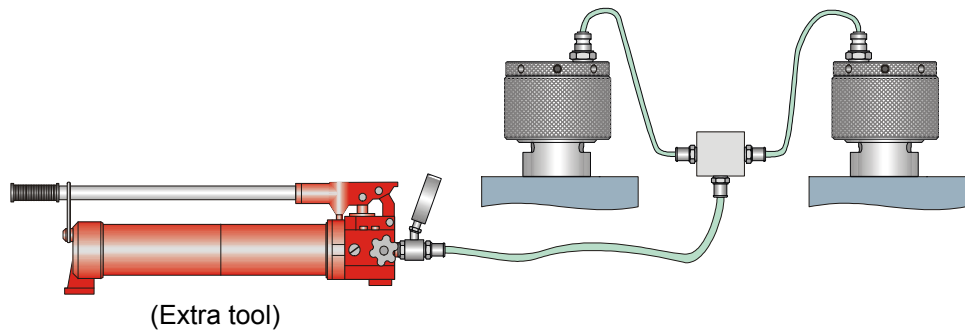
Hydraulic tightening tool set with 2 ports distributing piece
